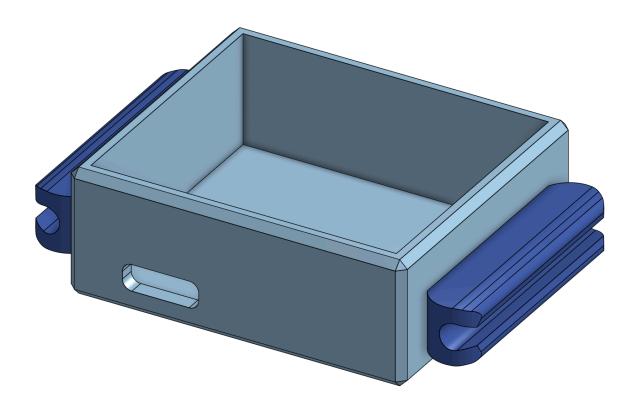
CAD assembly of the APDS-9960 wristwatch and the female wrist strap connectors.
